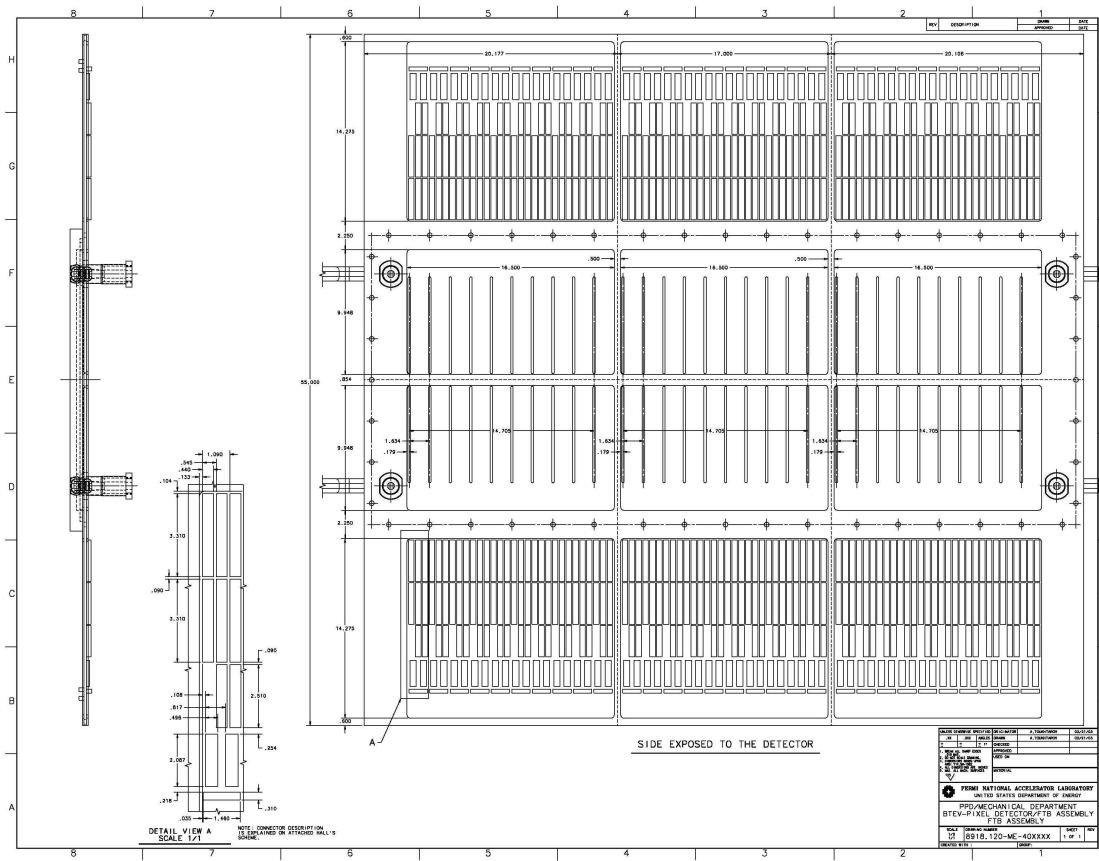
Engineering drawing of the complete feed-through board assembly. Signals are fed through the vacuum vessel via these printed circuit boards with high density connectors.
